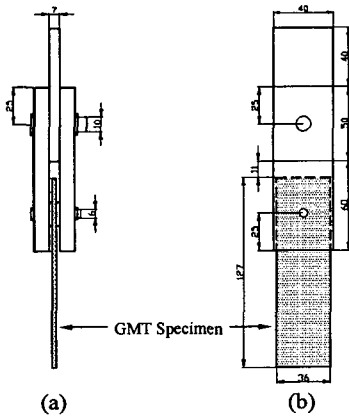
Schematic diagram of the loading fixture: (a) side view and (b) front view
